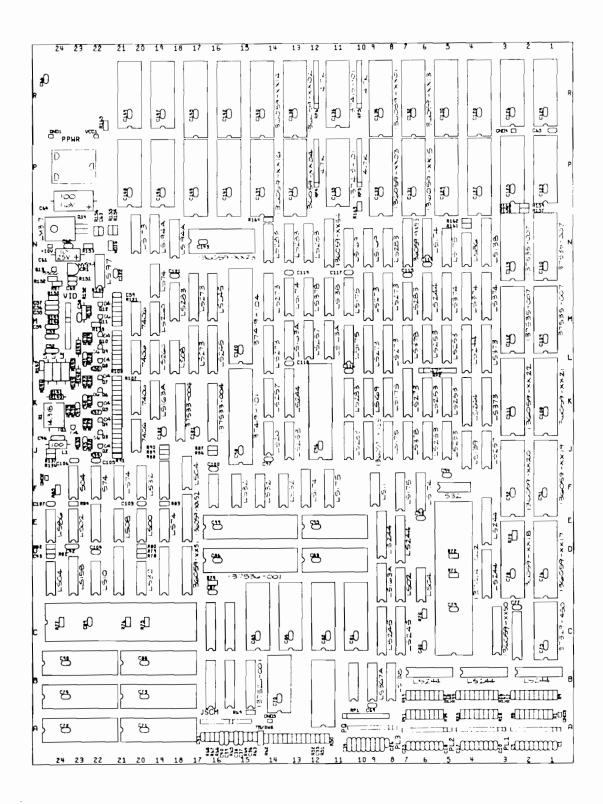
Vindicators Game PCB Assembly A044402-21 A
